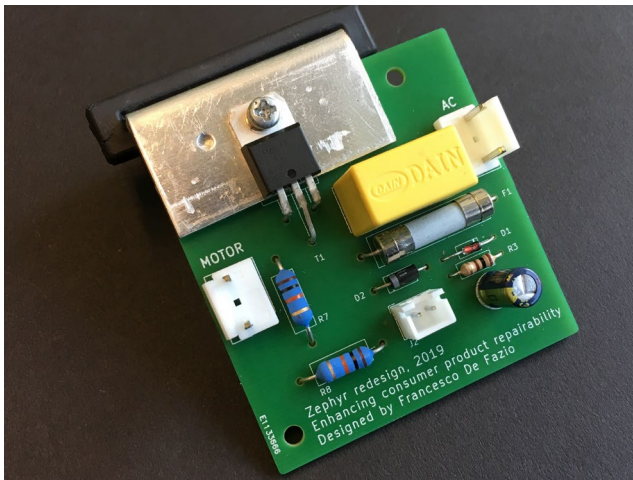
, 128, 129 and 130, Prototype of the PCBA redesign
